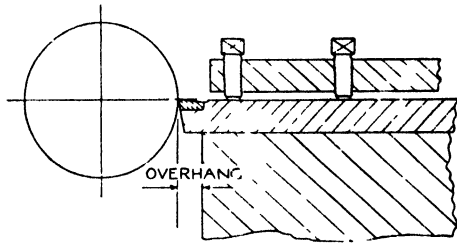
CORRECT SETTING UP OF TOOL IN MACHINE
